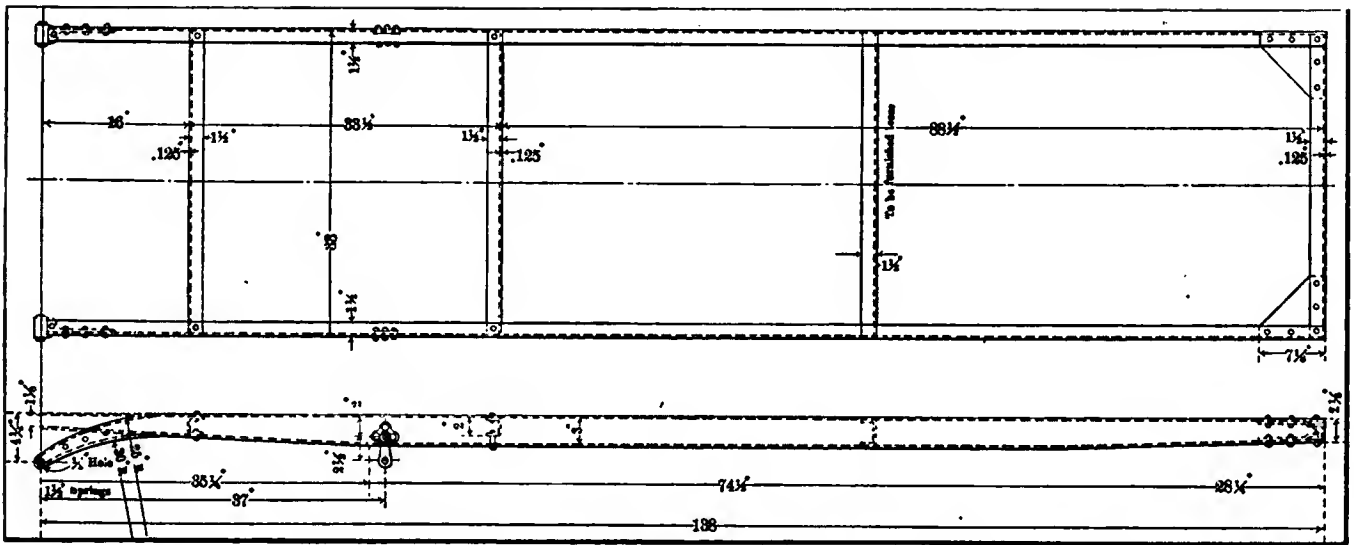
Schacht frame in plan and elevation, showing straight front and rear, and four stout cross members well disposed
